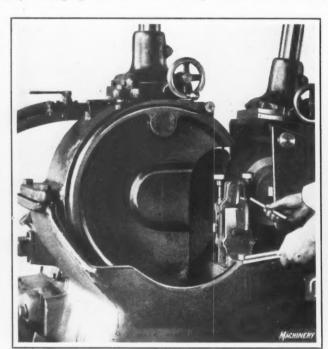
Method of feeding Plain Cylindrical Work into the Machine
